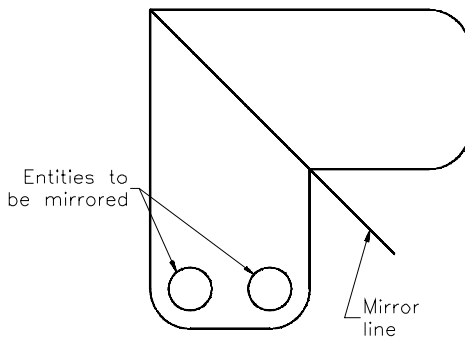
Selecting the geometries to be mirrored about the mirror line
